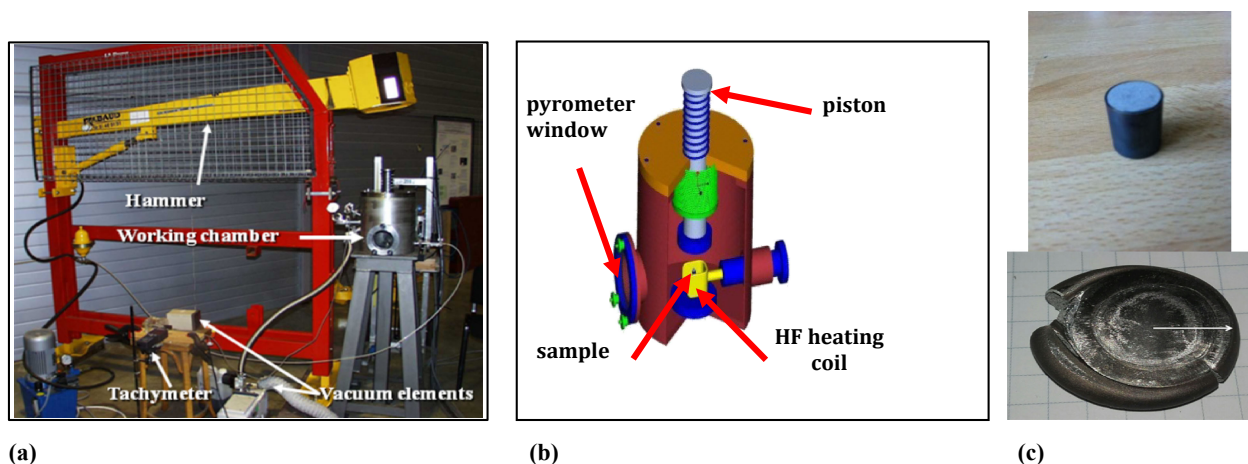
Forging at Néel Institute, Grenoble. (a) – the machine with a hammer shocking the forging piston, equipped with a tachymeter and a fast camera, (b) – the chamber containing the sample that can be *in-situ* heated by a HF heating coil, (c) – up: the sample before forging and down; after forging.
